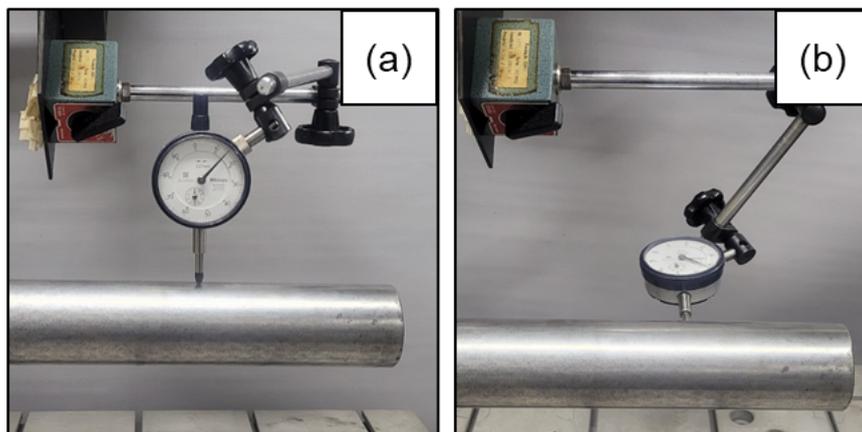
Positioning of the dial gauge during (a) vertical measurements and (b) horizontal measurements.
